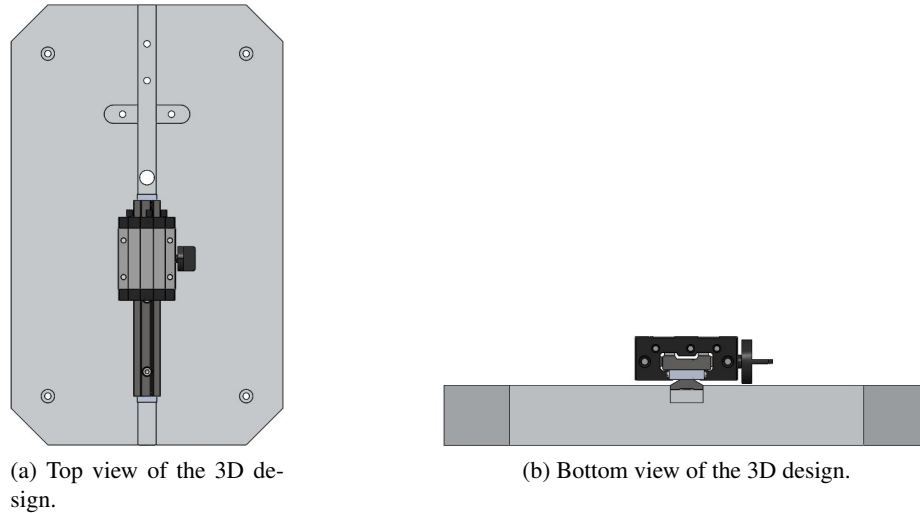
Final 3D design and positioning of the horizontal linear guide on the table support plate.
